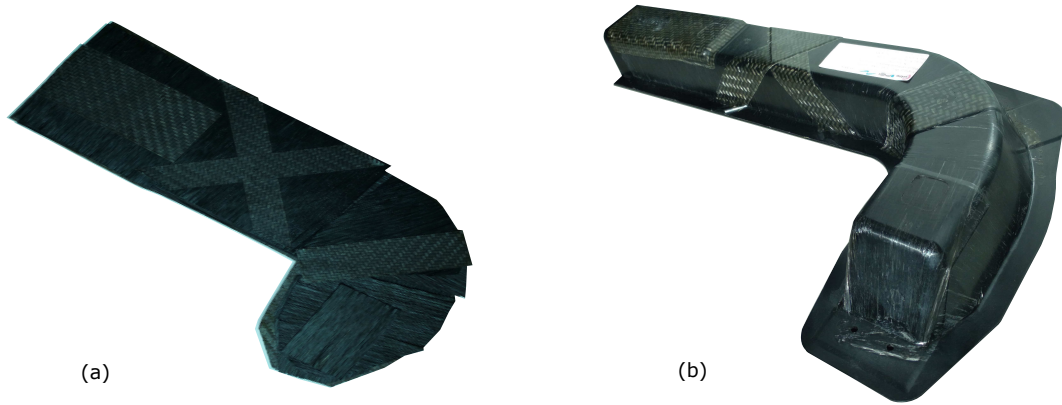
(a) Flat two dimensional stack of preregs before QSP® (b) Final formed part
